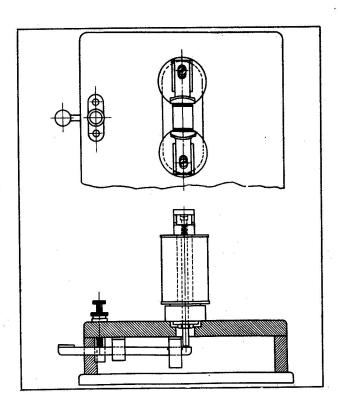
Magnetizer - Identical with Fig. 18, T. O. No. 05-15-9
